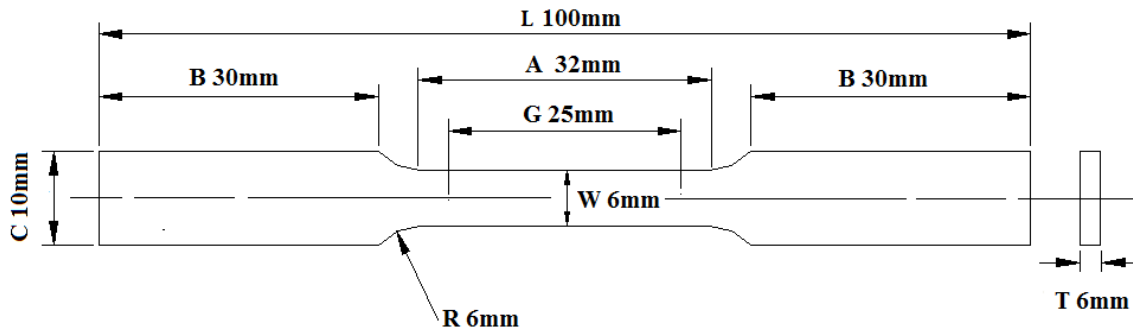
Tensile specimen as ASTM B557 M-94 [6], G is gage length, W is width, T is thickness, R is radius of fillet, L is overall length, A is length of reduced section, B is length of grip section and C is width of grip section.
